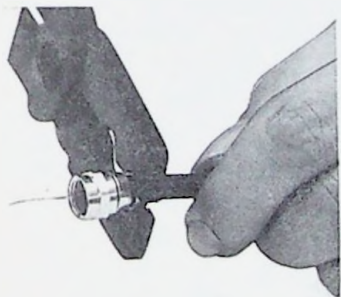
Coax crimping tool. (Courtesy Winegard Co.)
